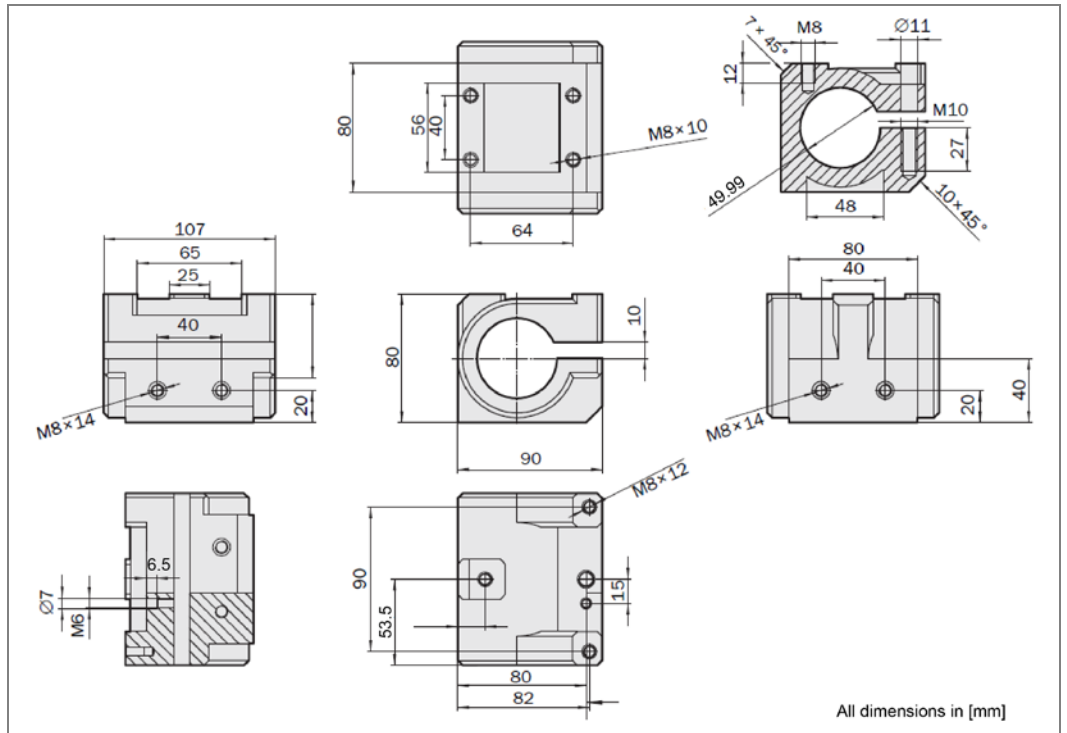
Dimensional drawing of the mounting adapter mounting block
